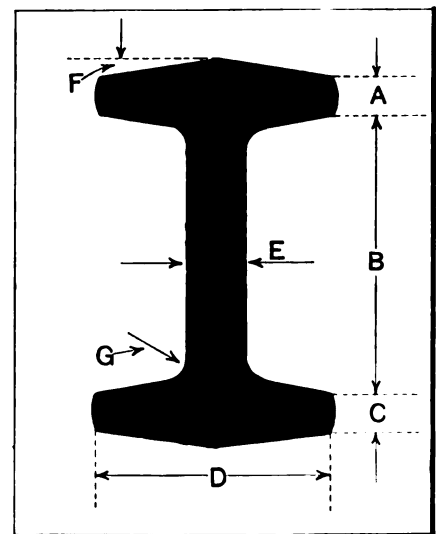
Section of I-type axle; the arched tops are used to suit the moulds in stamping
